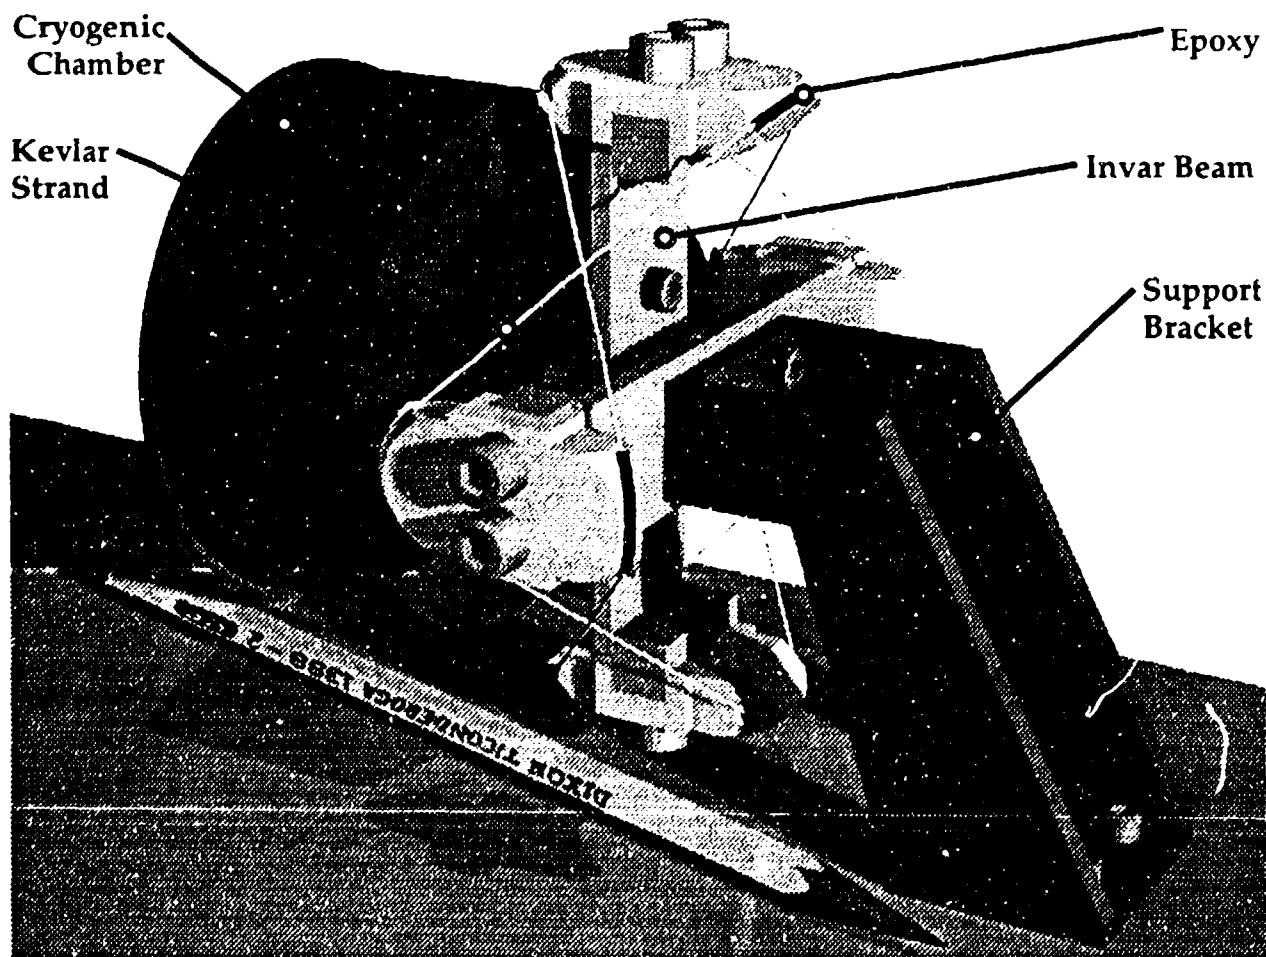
Attachment fixture using Kevlar strands. A cryogenic chamber is shown mounted on one side of the fixture and the other side of the fixture is attached by a support bracket to a higher-temperature base plate.
